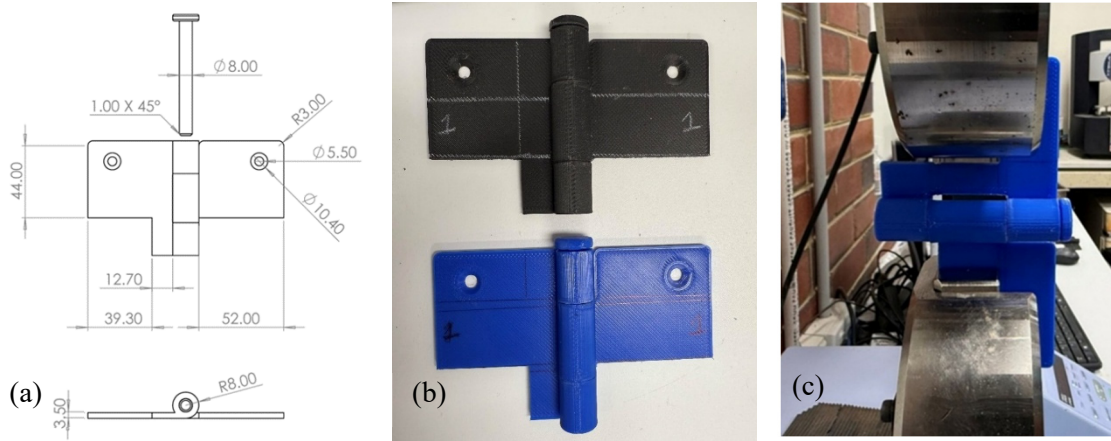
(a) hinge design sketch (all dimensions in mm), (b) PLA-CF (top) and PLA (bottom) and (c) hinge UTM mounting method
